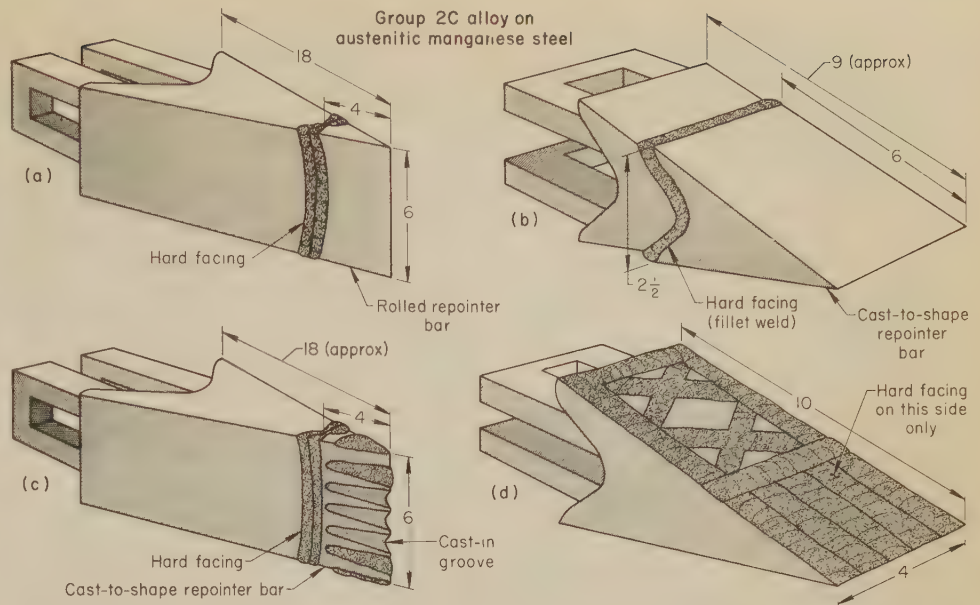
Manganese steel bucket teeth rebuilt with (a) rolled repointer bar, (b) cast-to-shape repointer bar, and (c) grooved cast-to-shape repointer bar. (d) Hard faced tooth, new or rebuilt, showing a typical bead pattern on top only to promote self-sharpening (see text).
